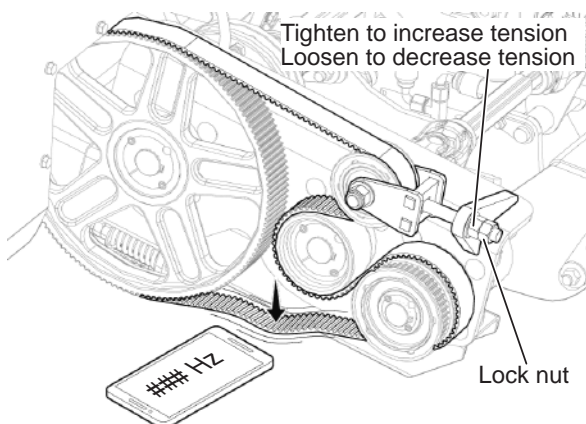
Feed Auger Drive Belt Tension Adjustment
